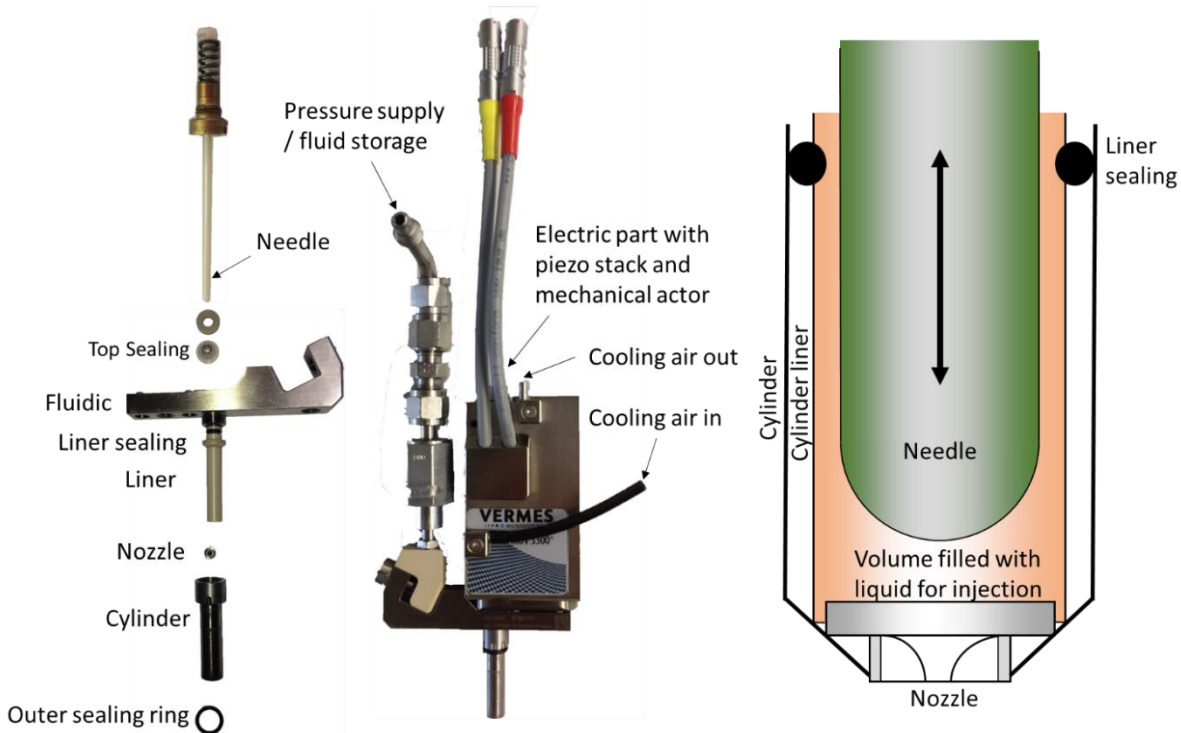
Left: Disassembled liquid carrying parts of injector; Center: Complete assembled injector; Right: Sketch of a cut through the injector front end [124].
